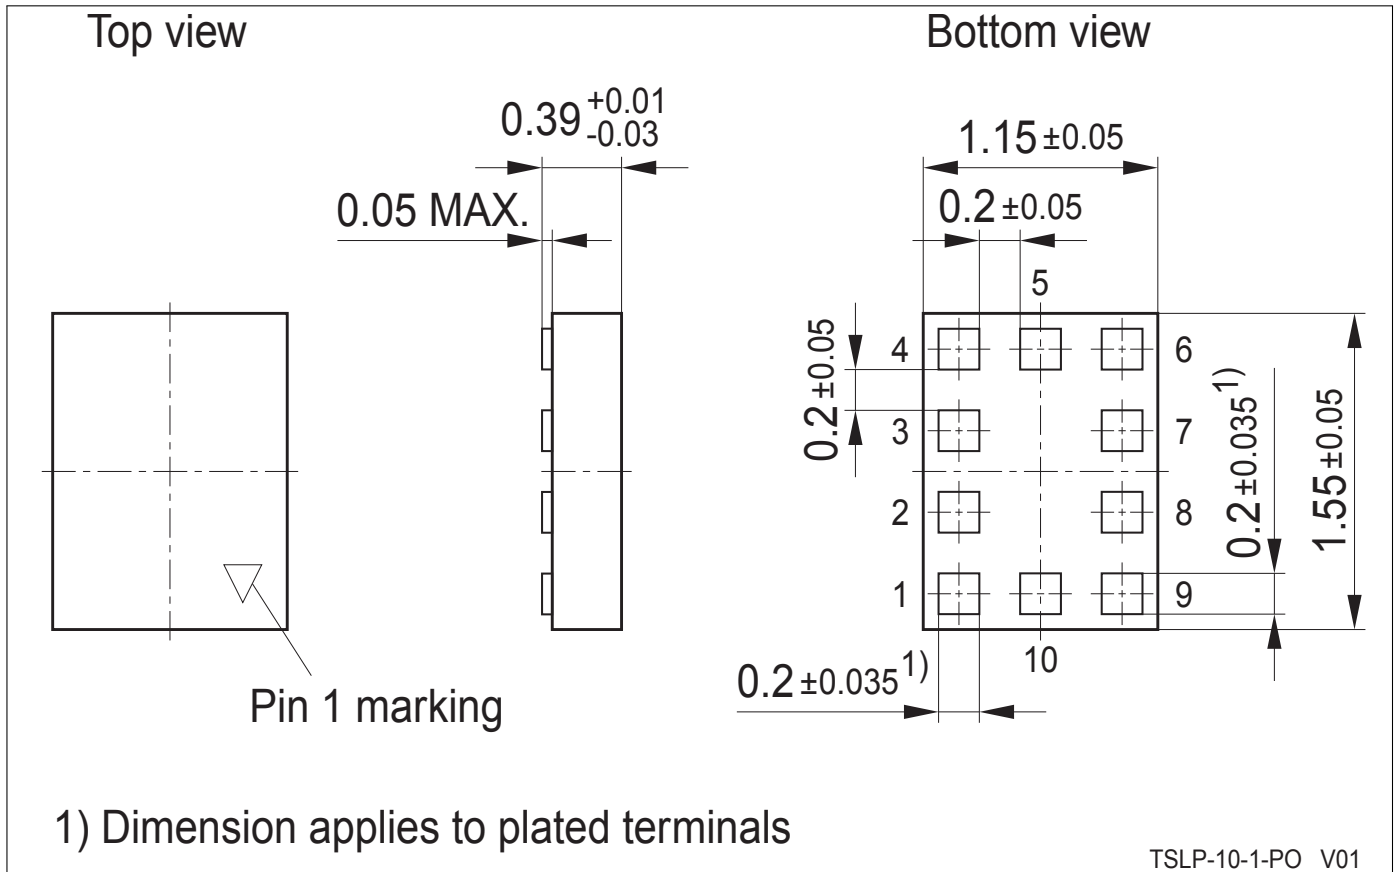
TSLP-10-1 Package Outline (top, side and bottom view)
